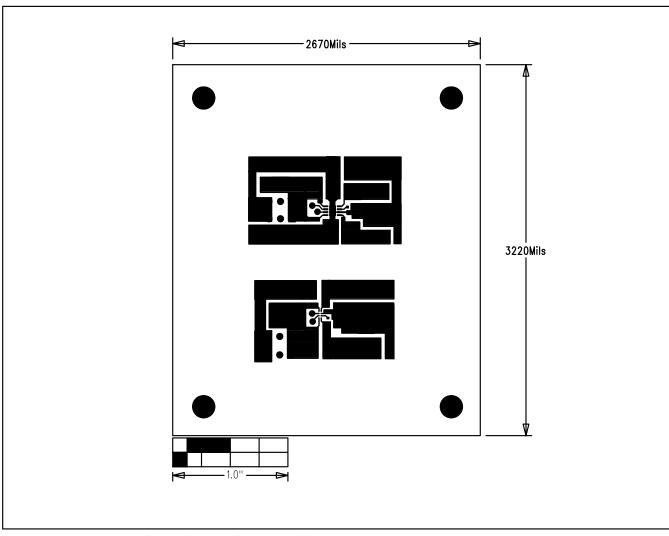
MAX8559 EV Kit PC Board Layout—Component Side
